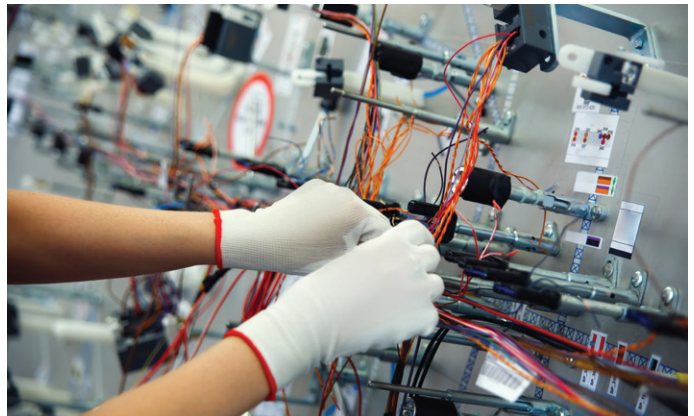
Wire harness manufacturing is still a labor intensive process relying on manual assembly.
